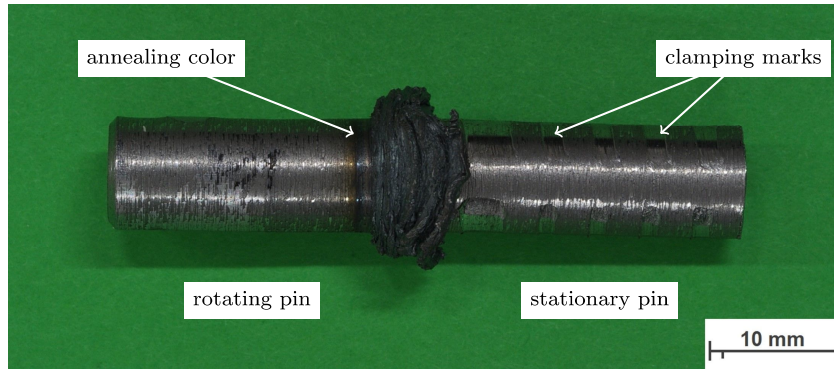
As-welded RFW low-carbon steel specimen
